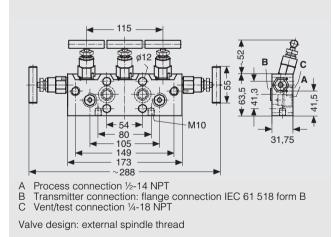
/82 Five-spindle valve manifold DN 5, dimensions
